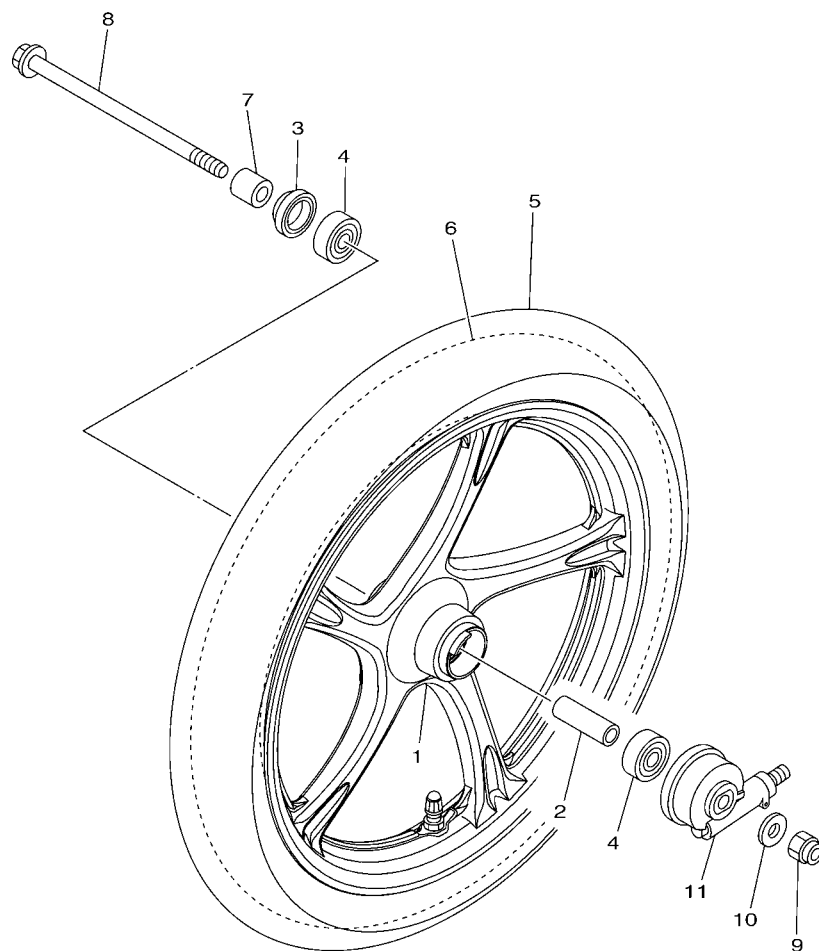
FRONT WHEEL FOR CAST WHEEL
